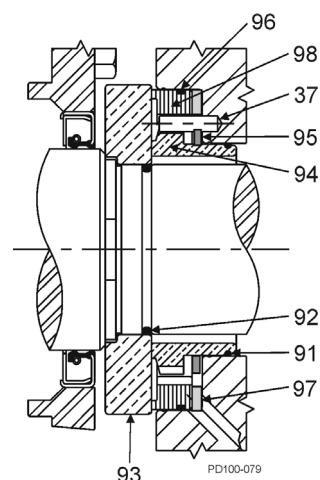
Single (Bottom) and Double (Top) Mechanical Seal
